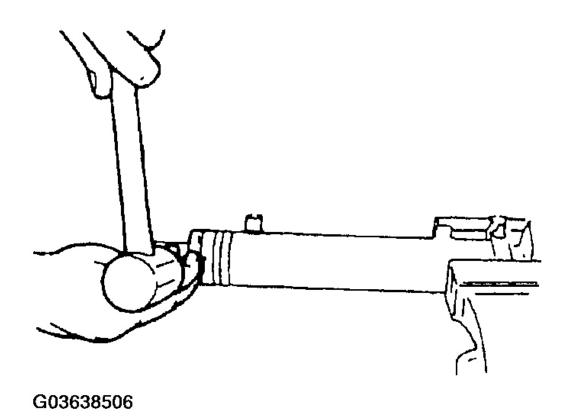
Staking Holder To Cylinder Using A Punch Courtesy of MAZDA MOTORS CORP.
